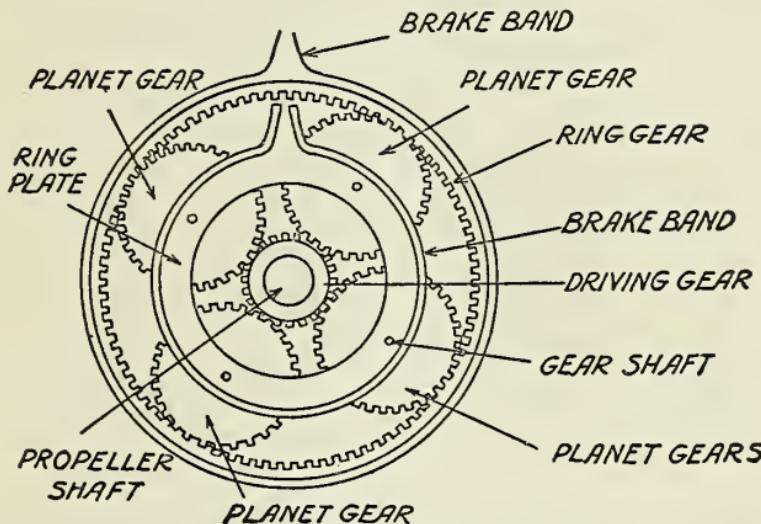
A. Diagram showing how a planetary transmission gear works.
